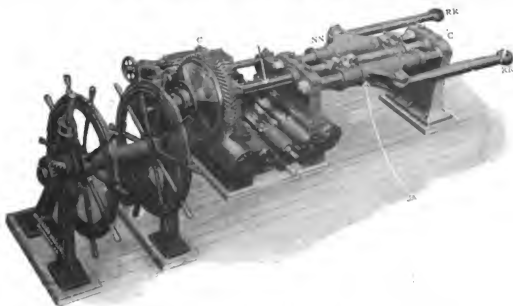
WILLIAMSON BROTHERS' STEAM AND HAND STEERING ENGINE OF THE SCREW-GEAR TYPE.
